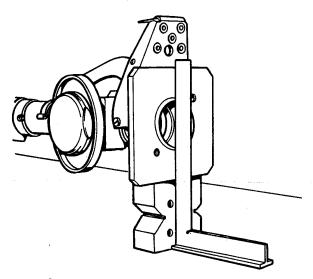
Checking Rear Axle Beam for Horizontal Deformations with Angle Gauge Applied to Outer Face of Flange A.70172
